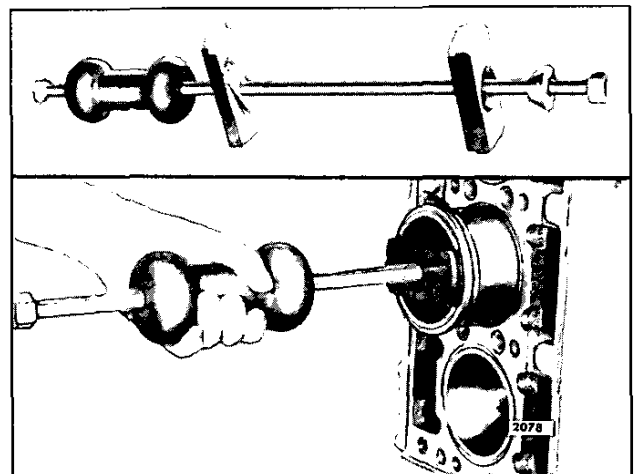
Removing Cylinder Liner with Tool J 22490
